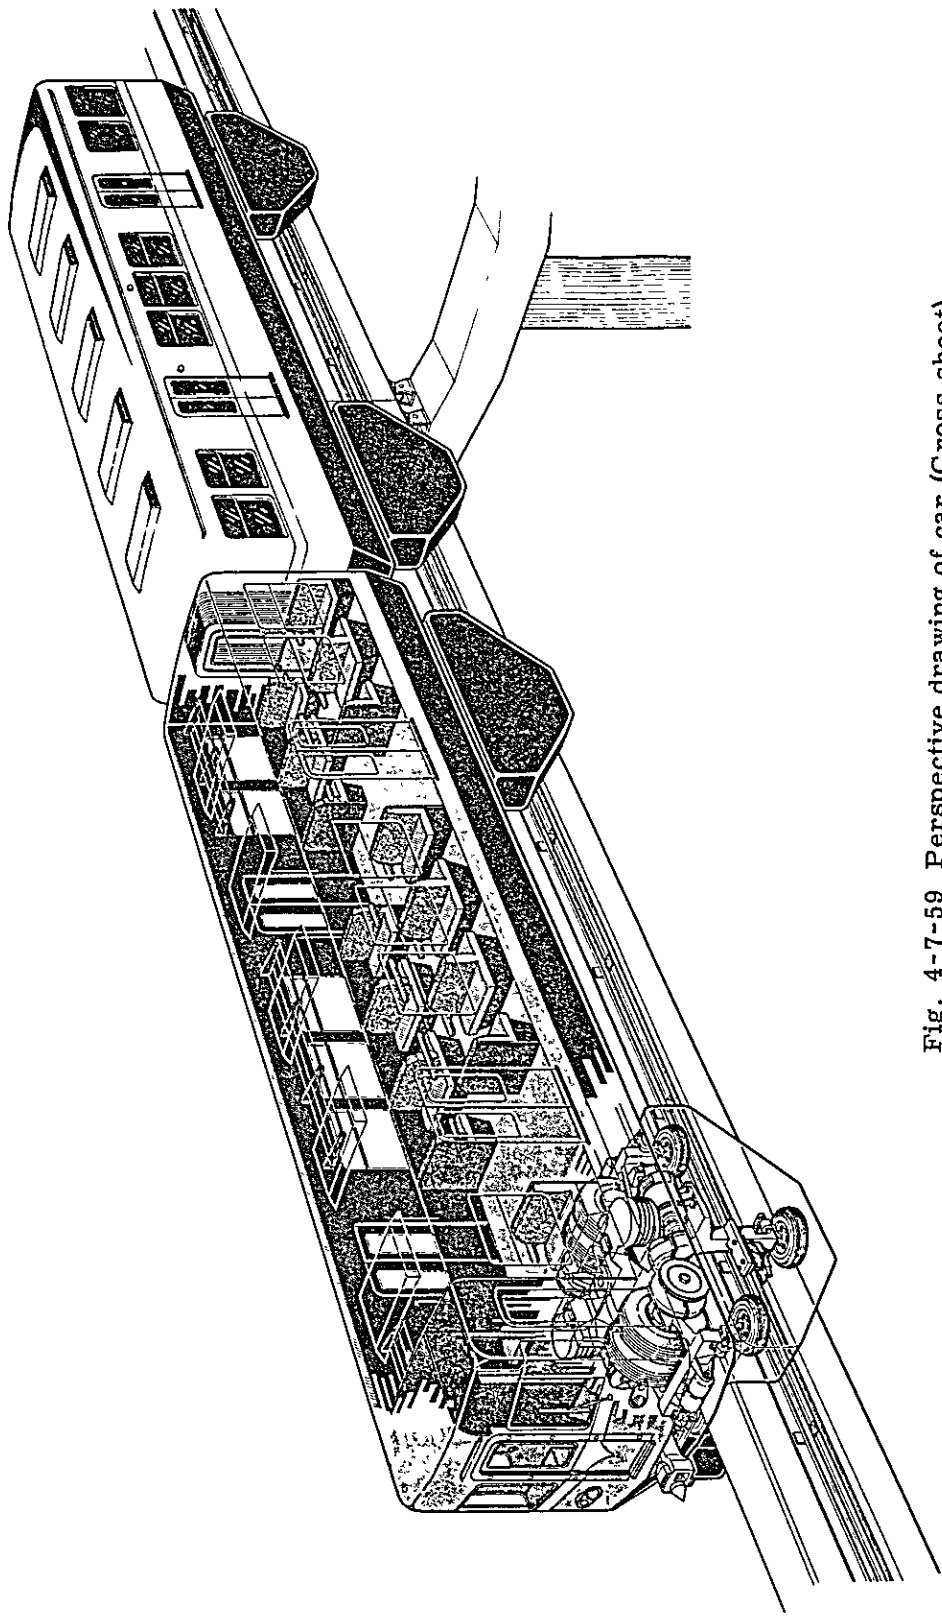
Perspective drawing of car (Cross sheet)
